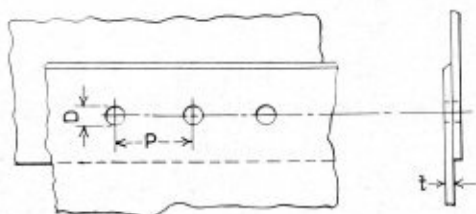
Single-riveted longitudinal or circumferential lap joint
